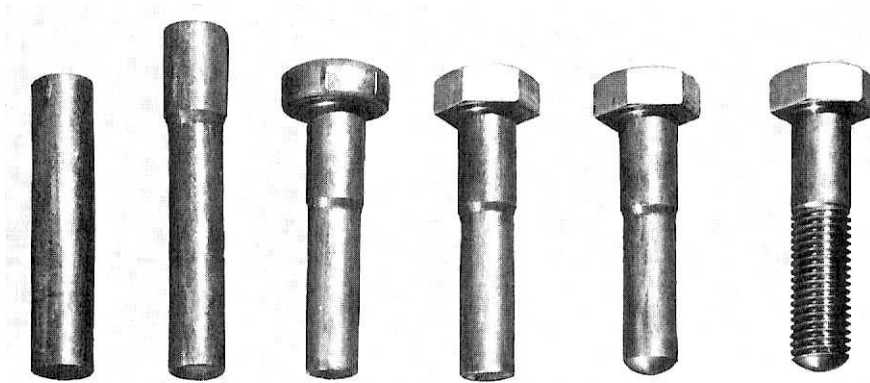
Steps in cold-forming a bolt by extrusion, cold heading, and thread rolling.
